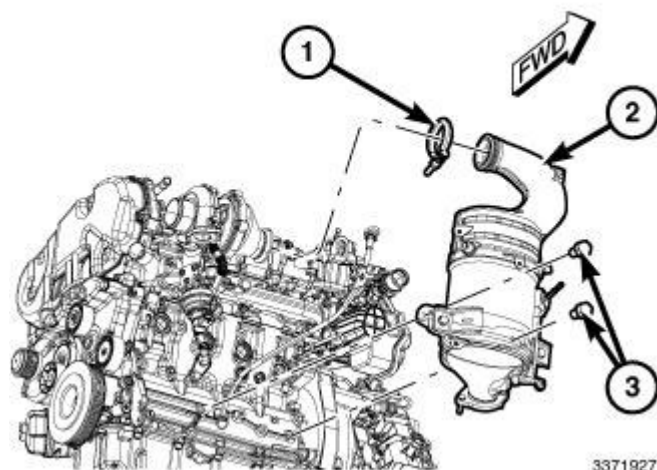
Clamp, Turbocharger & Two Attaching Bolts
